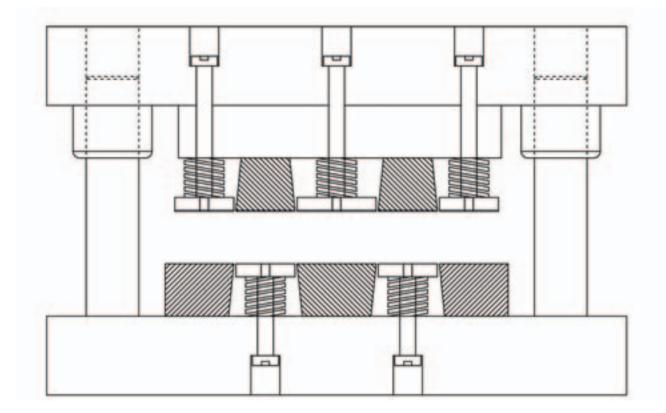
21 Completed Compound Die with Spring Mounted Strippers
